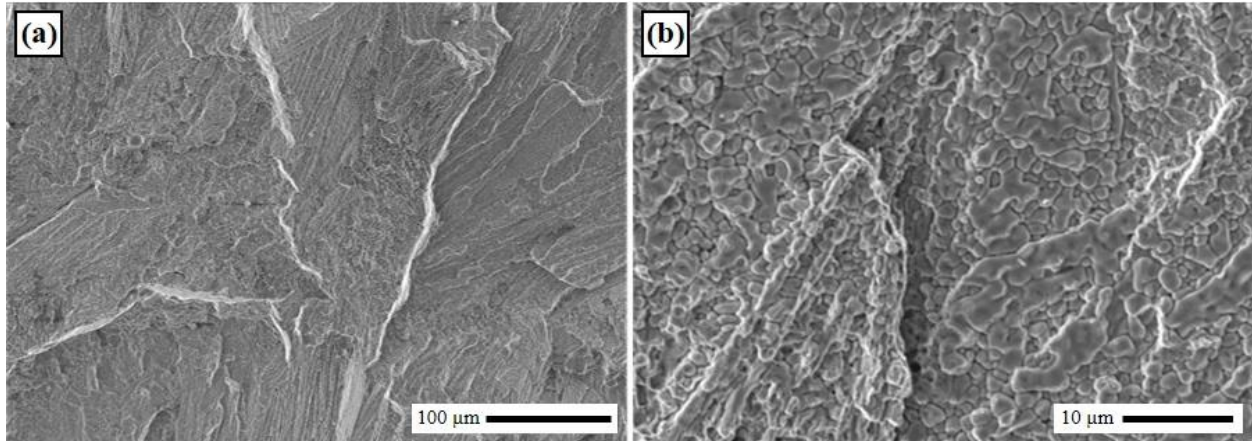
Fracture surface of hot crack in A386 + 10% NiCr (a) transgranular fracture, (b) partially formed dendrites with open spaces in-between.
